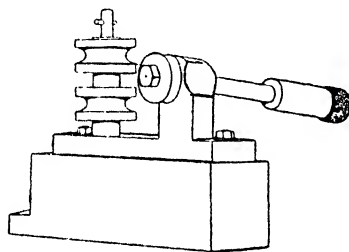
Small hand-grinding machine for grinding needles in the drilling machine
